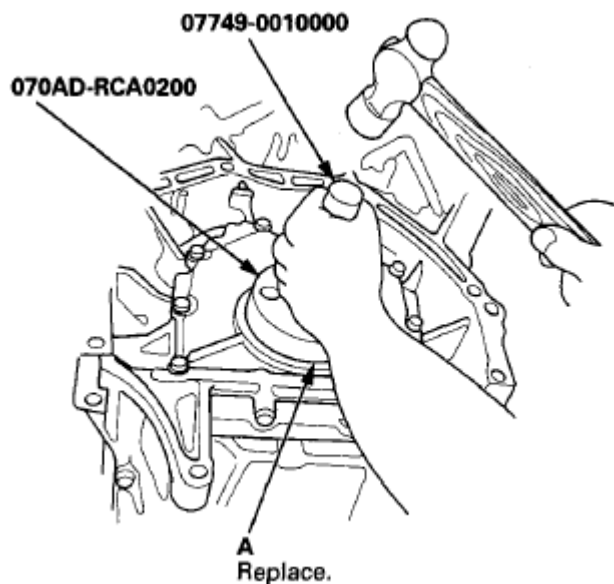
Installing Transmission End Crankshaft Oil Seal Using Driver Handle
